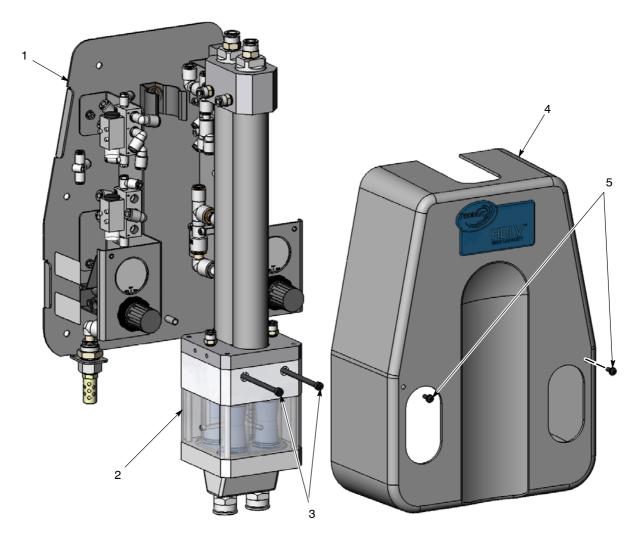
Prodigy High-Capacity HDLV Pump Parts
